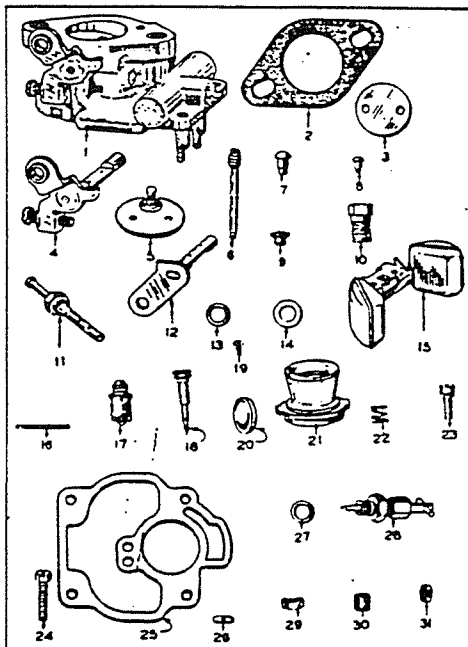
CARBURETOR PARTS GROUP - GASOLINE
